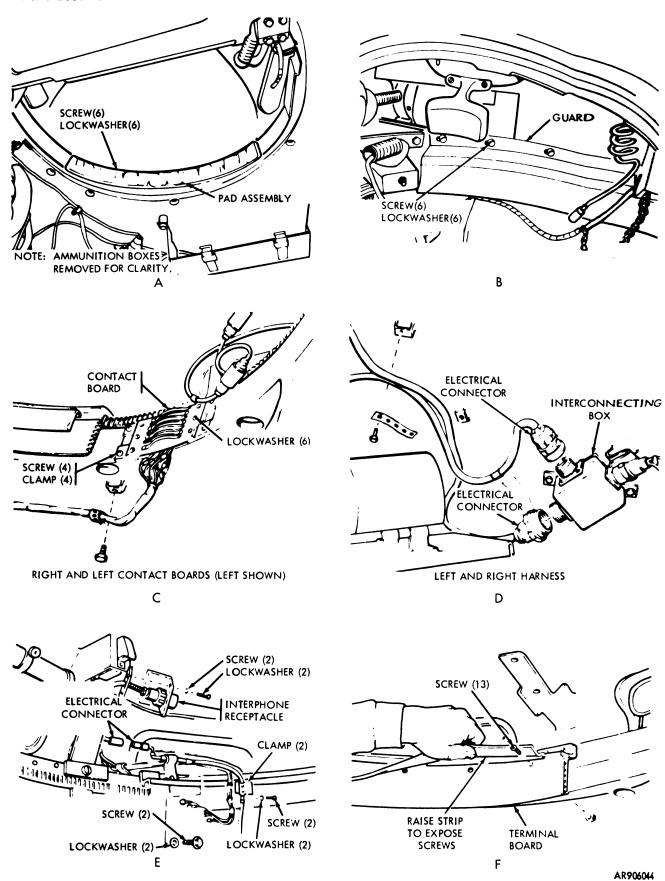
M1 cupola electrical terminal boards removal or installation.
